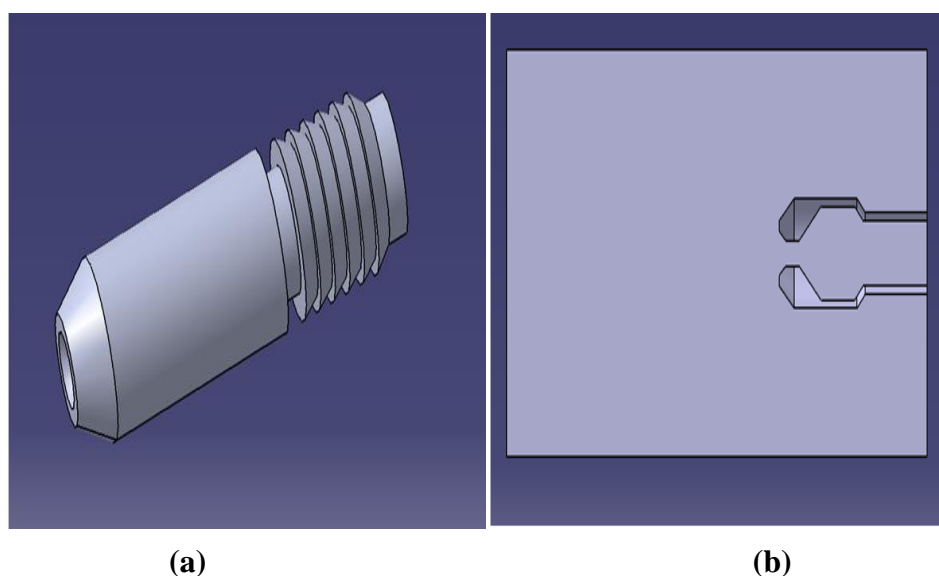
Cone Nozzle Geometry (a) Cone Nozzle (b) Solid Surface of Cone Nozzle
